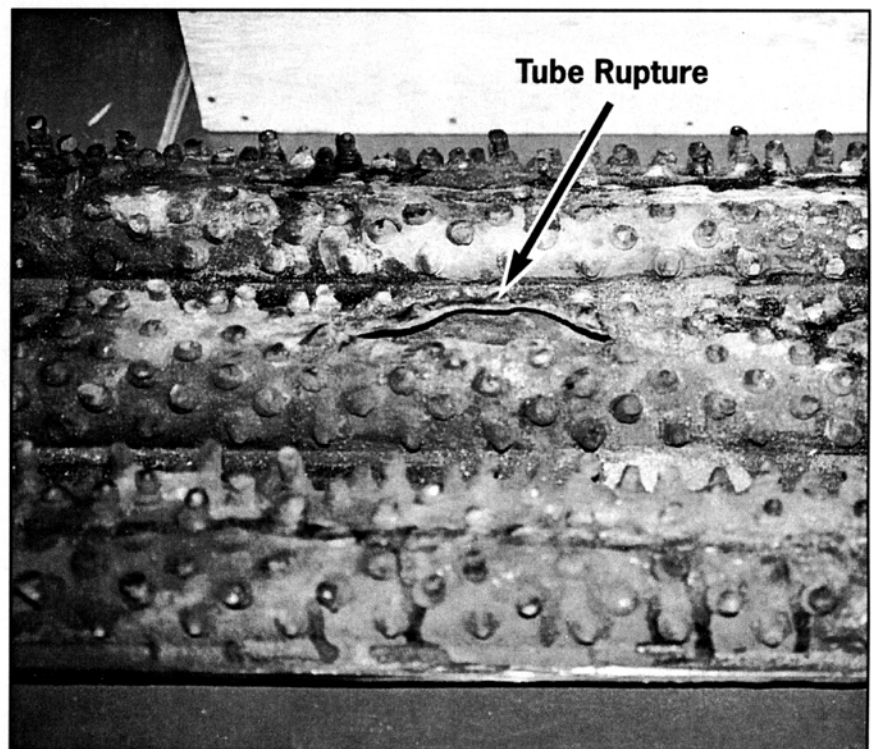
Floor tube failure and associated wastage of pin-studded tubes.
